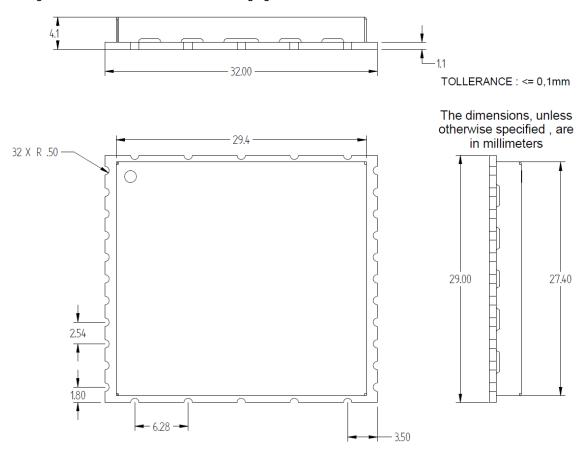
Package Dimensions, Top, Front, and Side Views
